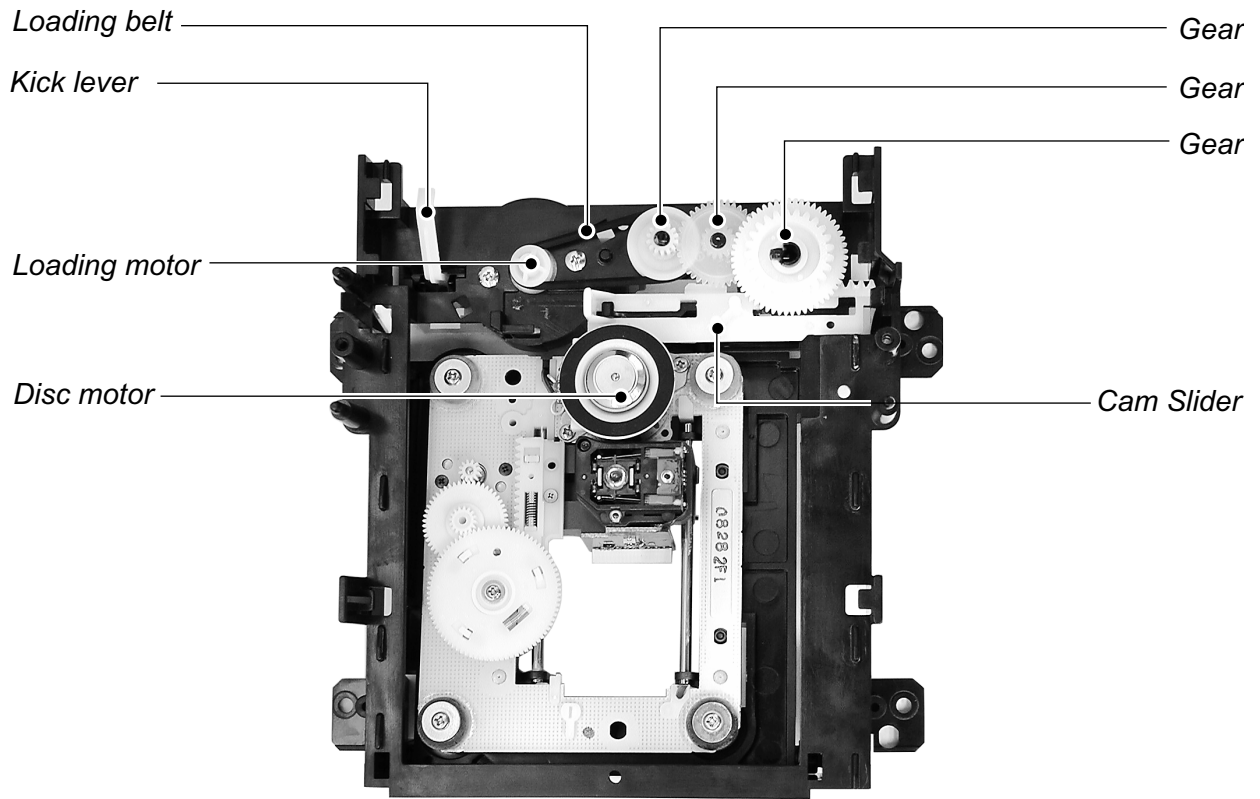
Mechanism chassis assembly (Internal side)
